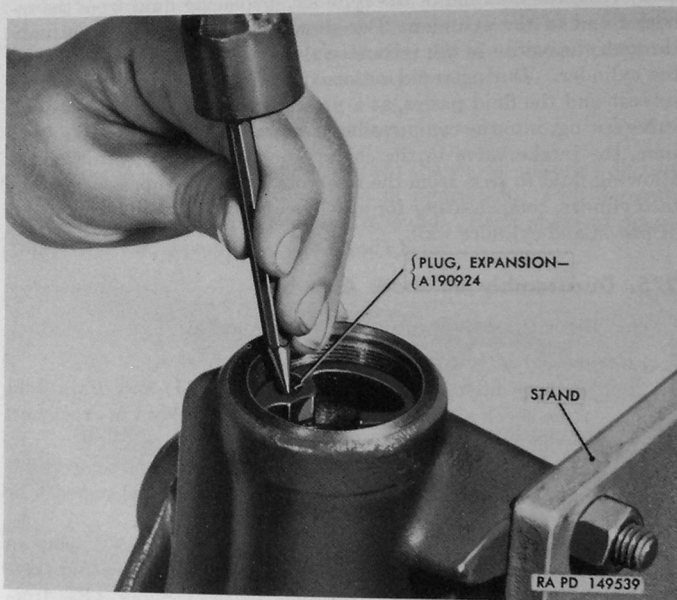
Removing piston screw expansion plug with shock absorber mounted in stand 41-S-4977-5.
